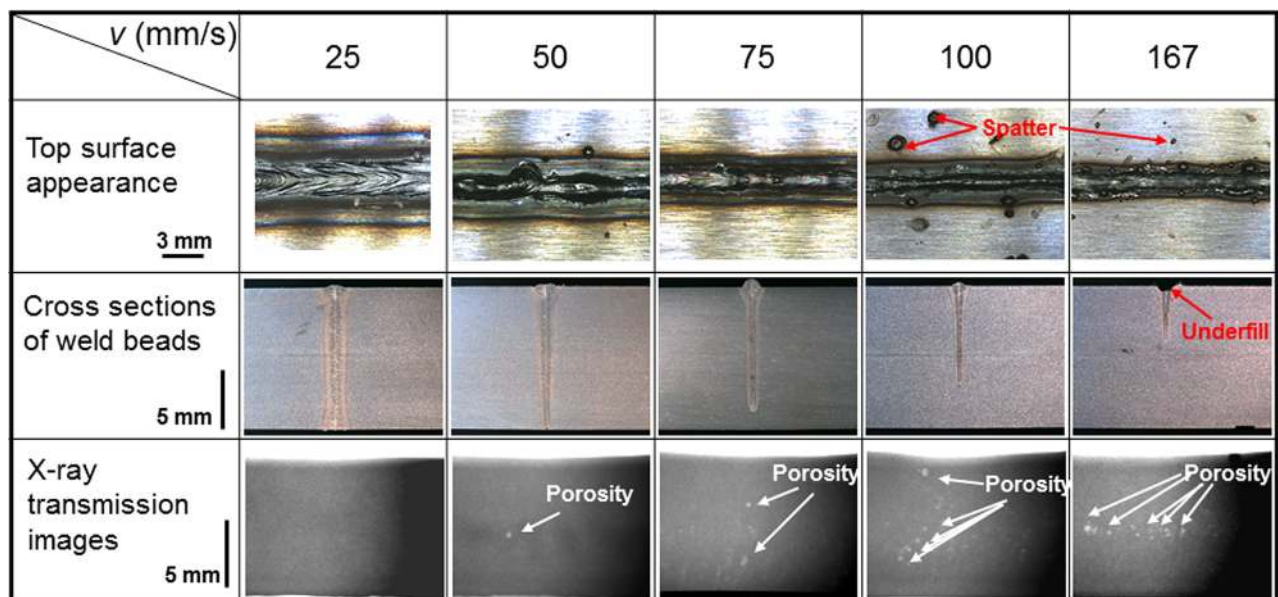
Top surface appearance, weld beads, and X-ray transmission analysis of cross sections obtained by fiber laser welding of a high-strength steel with optics system B (4 mm focus depth).
